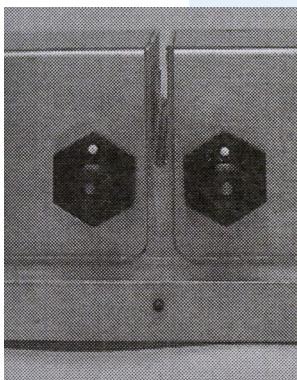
Showing drive pegs set uppermost ready to fit grinding wheels
